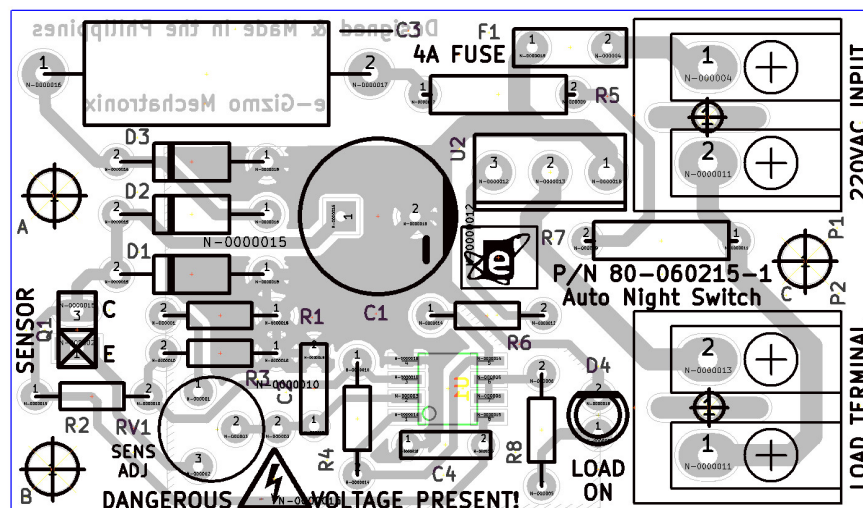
PCB Guide of e-Gizmo Auto Night Switch
